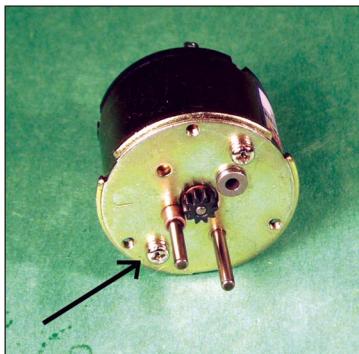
The 60-degree orientation mounting holes for the gearbox.
